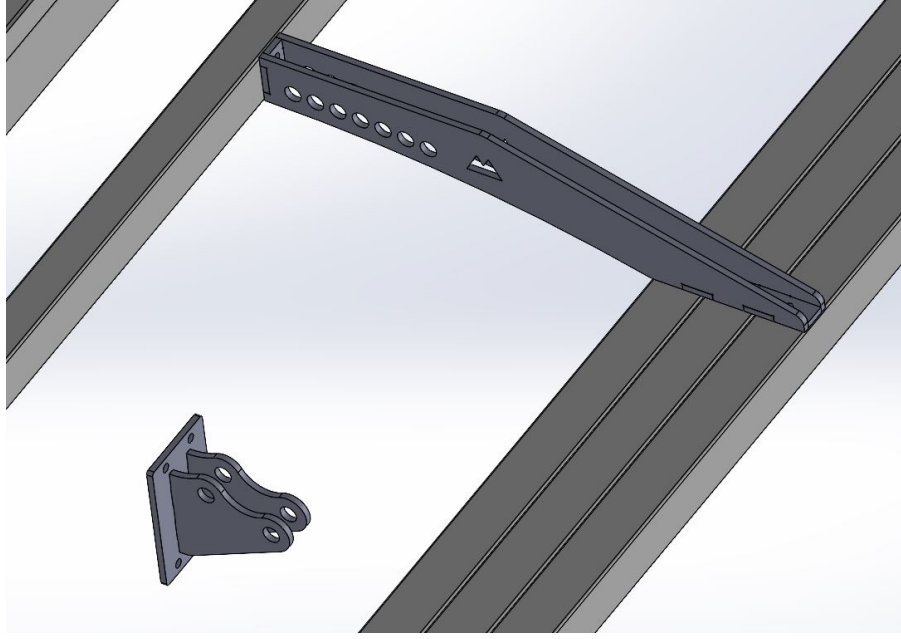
New top and bottom mounting arm design incorporating multiple actuation points to be able to adjust for the added weight of the membrane tensioner
